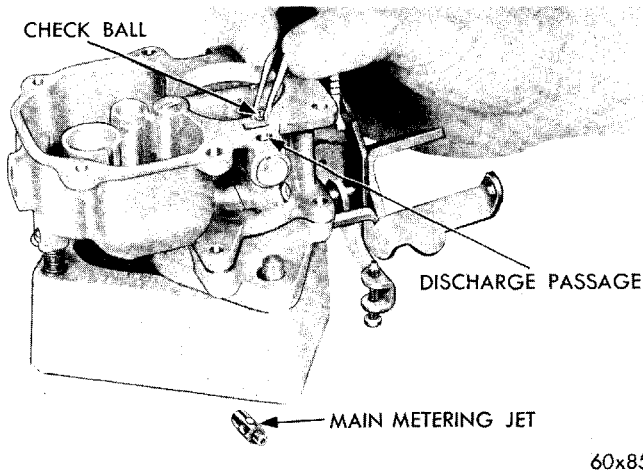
Installing Accelerator Pump Discharge Check Ball
